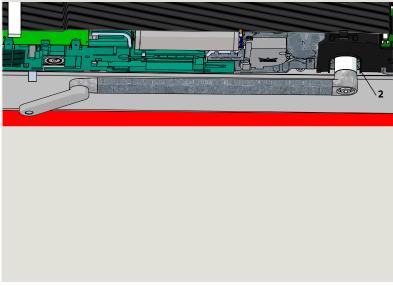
Install drive arm and extension onto ED100LE spindle
